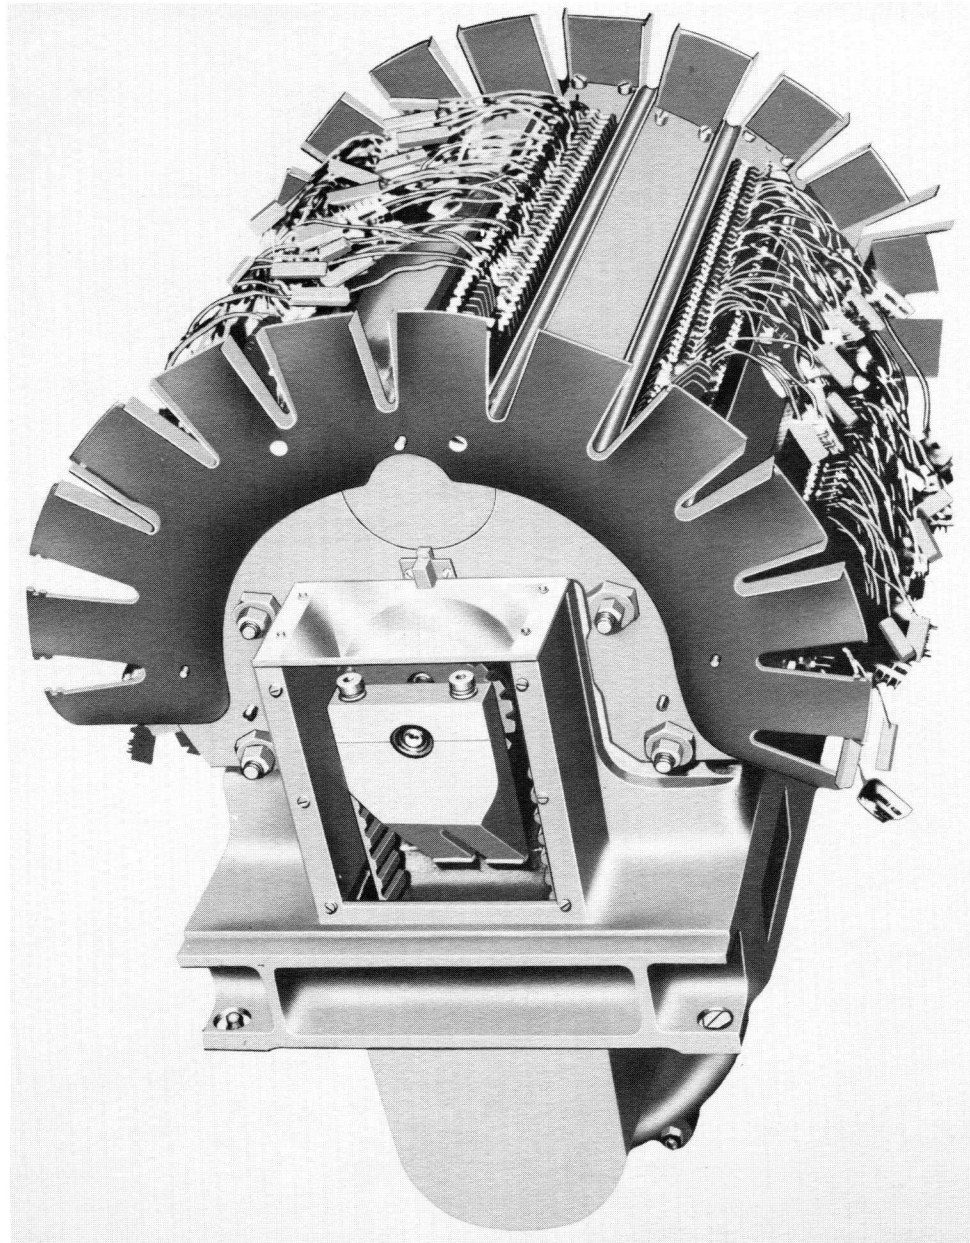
Drum Assembly Showing Drum Motor and Pulley Drive
